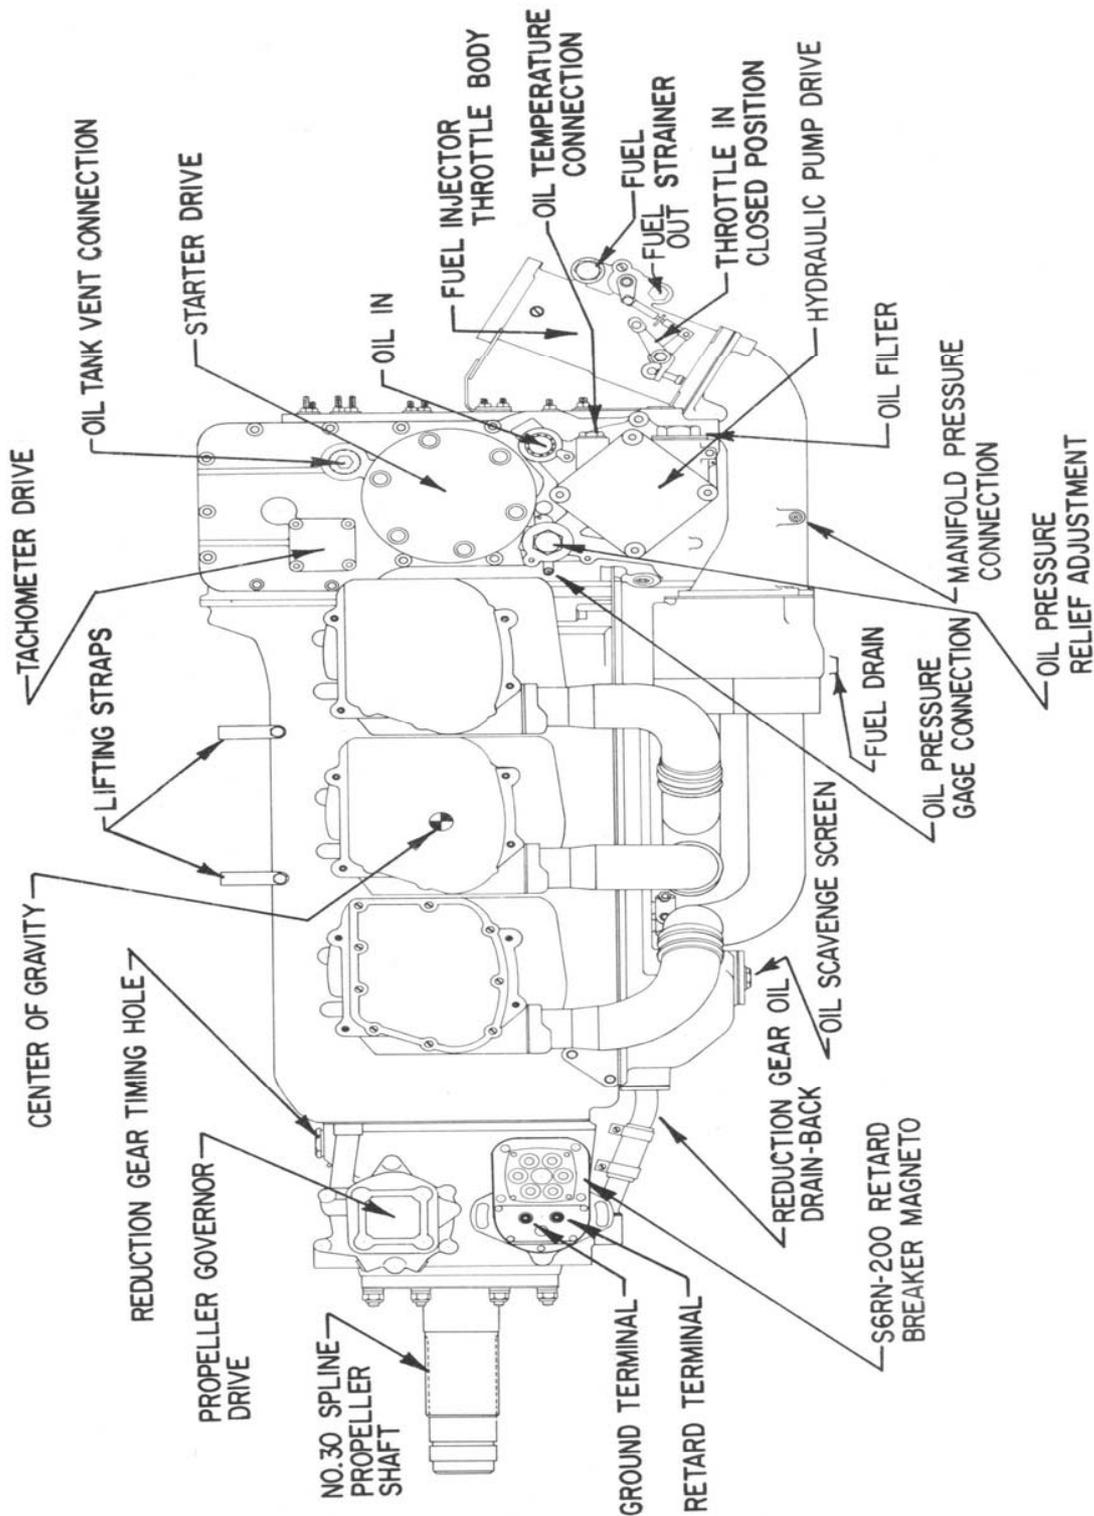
Installation Drawing – Typical IGO-540 Series – Left Side View
